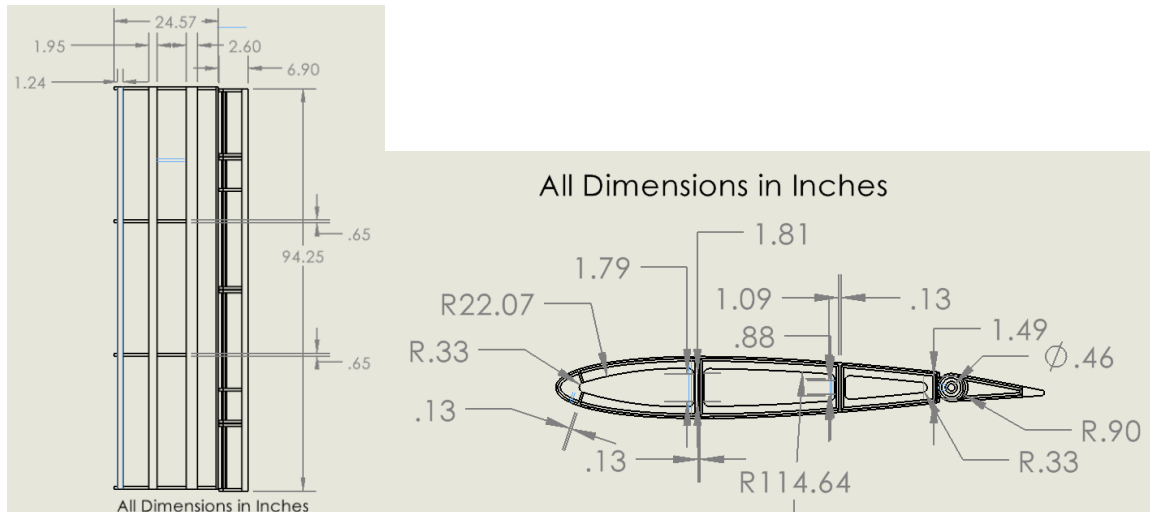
CAD drawing of aircraft horizontal stabilizer (half) design
